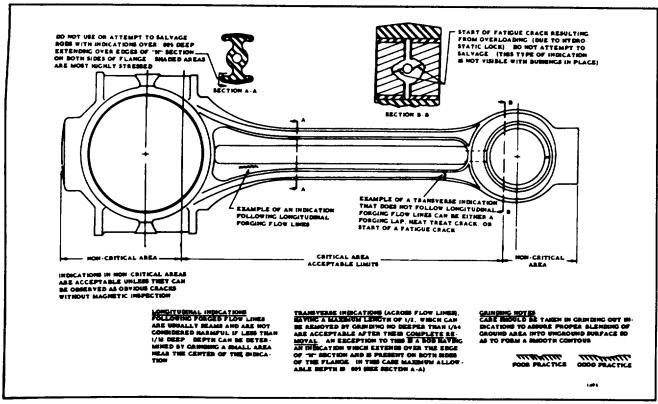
· Magnetic Particle Inspection Limits for Connecting Rod
